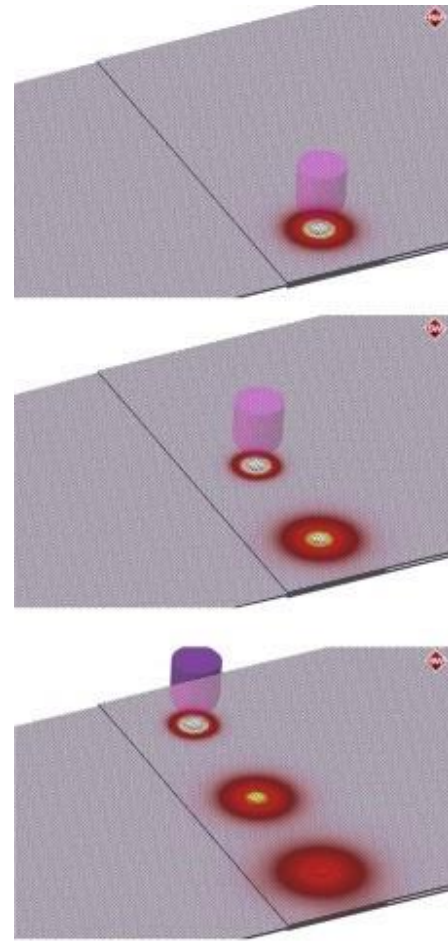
The sequence of welding in a three-sheet connection with three spot welds
